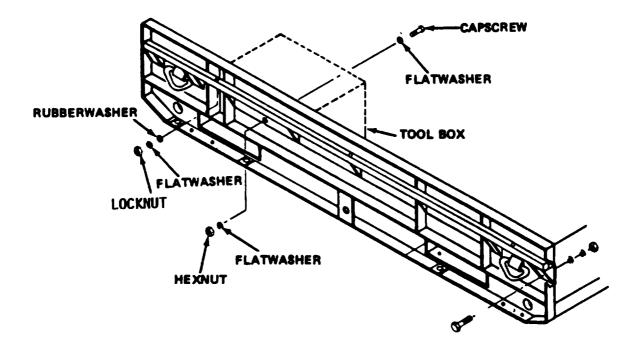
Mounting Hardware and Hole Location for Side Panel Assembly
